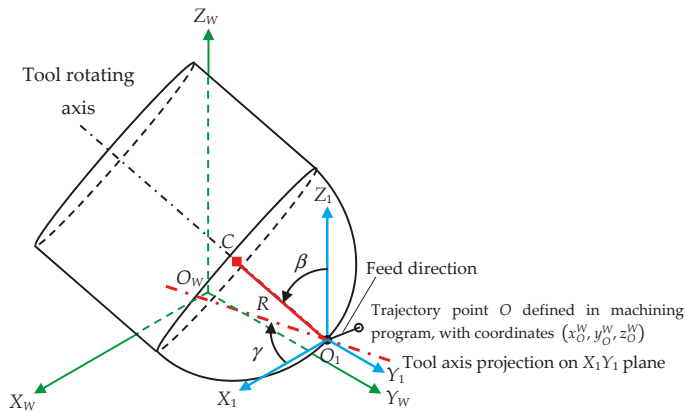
5-axis milling scheme with tool tilt angle β and lead angle γ .
